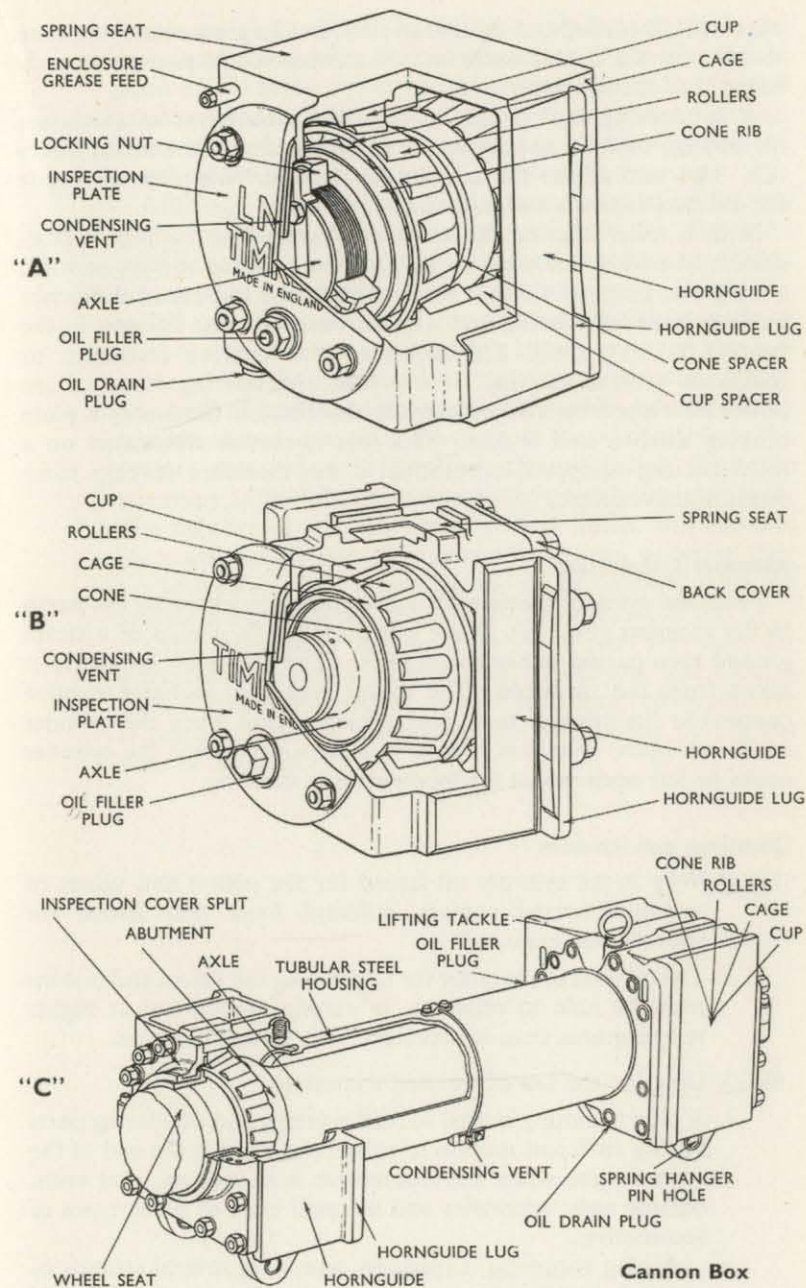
TYPES OF ROLLER-BEARING AXLEBOXES
